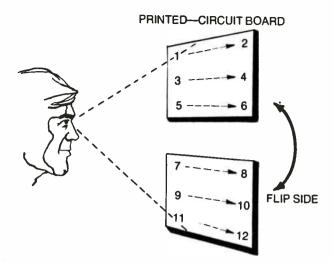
Scan the chassis or printed-circuit board as you would a printed page.
